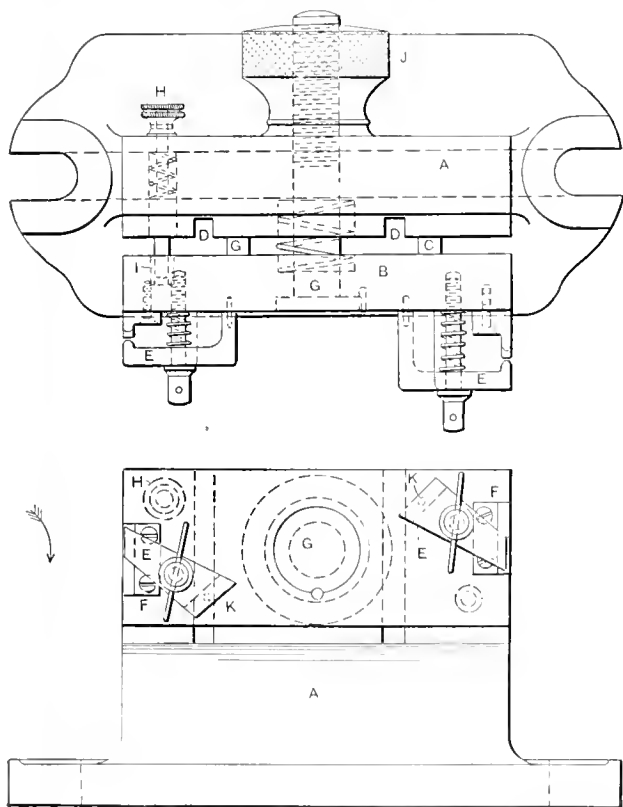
Fixture for Holding the Rod while the Bosses are being milled
